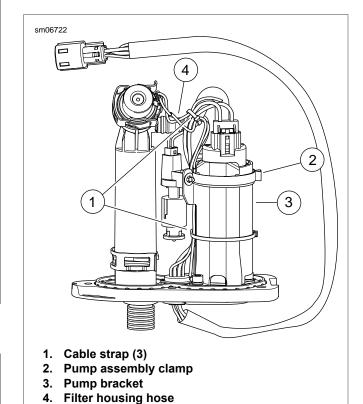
Fuel Pump Cable Straps and Pump Clamp
